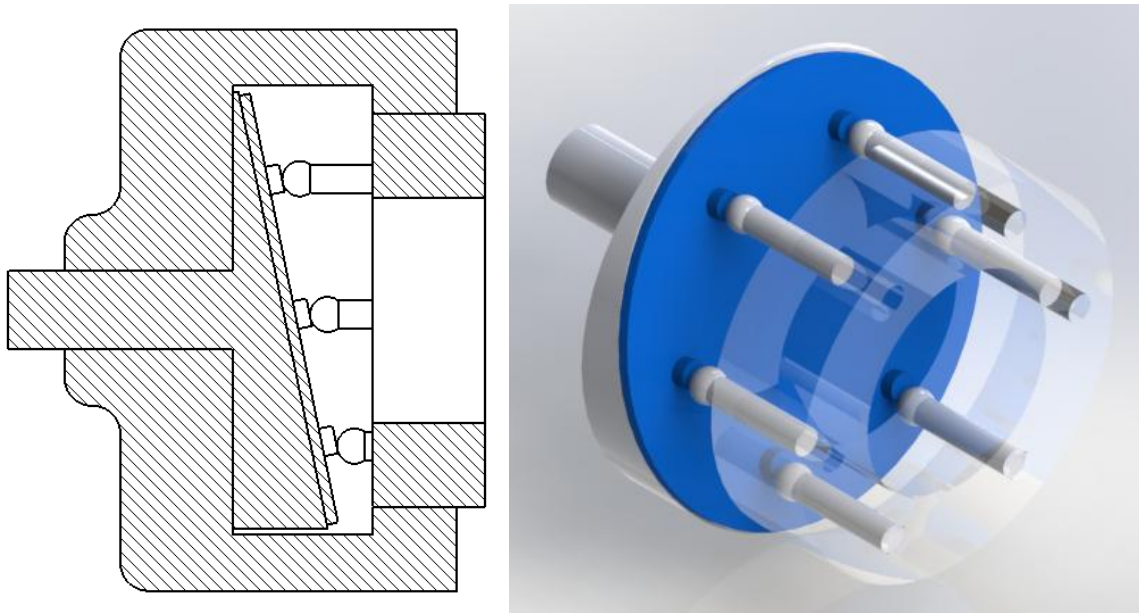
Axial piston motor has offset swash plate, causing pistons to pull in and out of bore as plate rotates.
